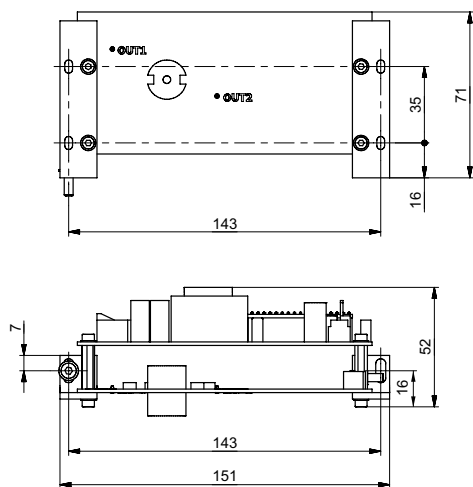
Outline drawing of OEM version DPB-10 and DPB-5 drivers with PS-5 power supply
